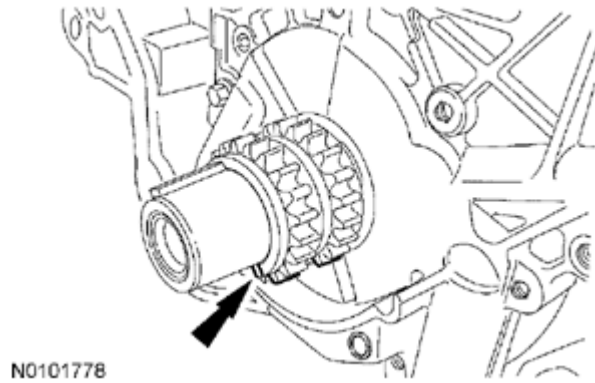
Locating Crankshaft Sprocket With Timing Mark Facing Out
